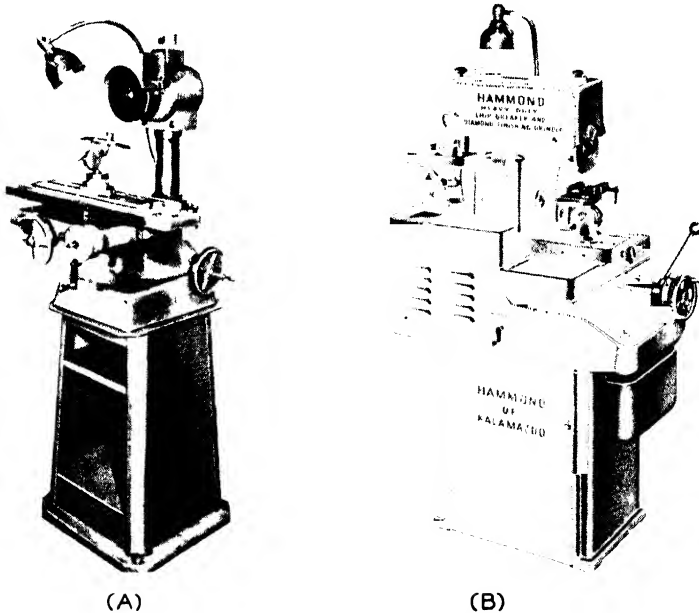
Two Types of Grinding Machines Used for Grinding Chip Breakers
